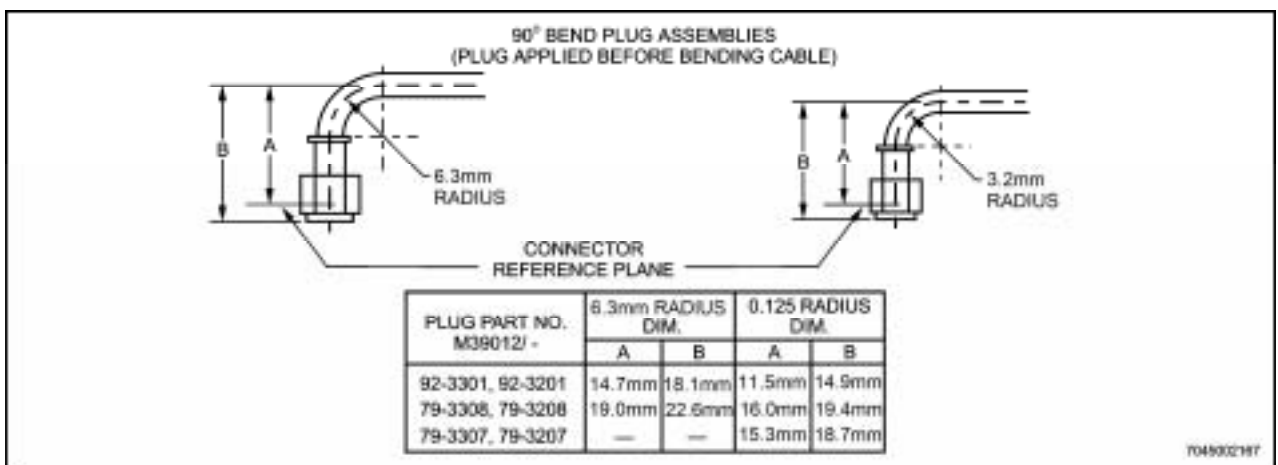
Radii Dimensions for Semi-Rigid Cable Bending
